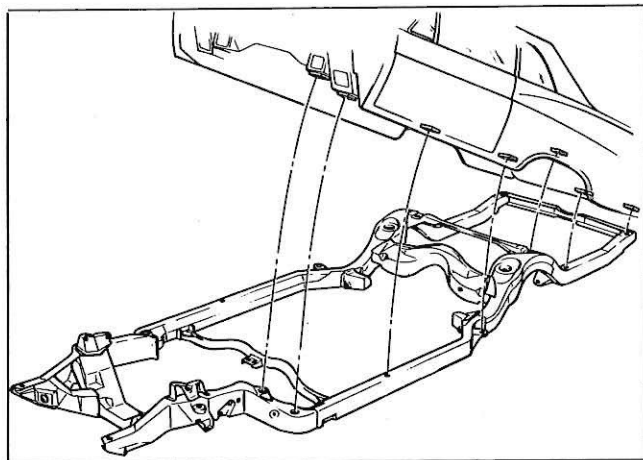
Chevrolet Frame Assembly and Body Mounts
